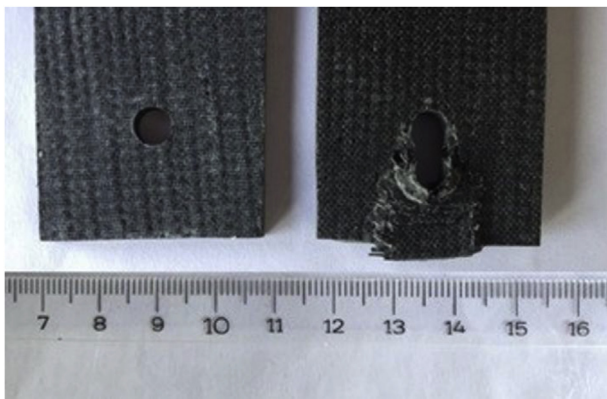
The specimen before and after the bearing test and shearout failure mode occurred in the entire specimens.
